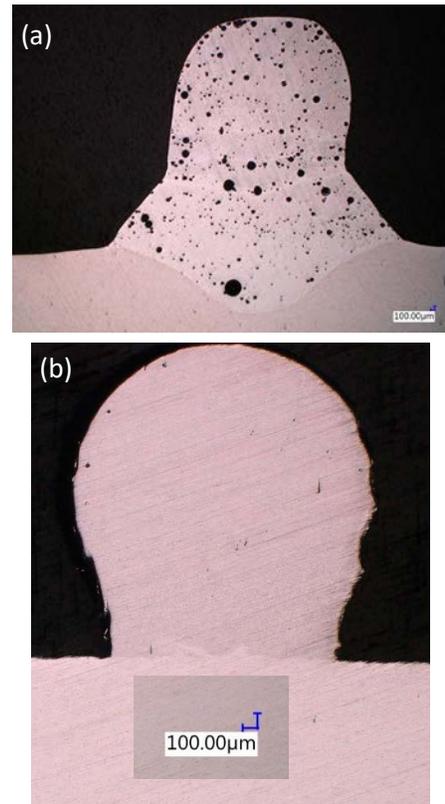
(a) Initial scoping study welding at high current and 90° torch angle and (b) lower current weld at 75° torch angle—note absence of porosity.
